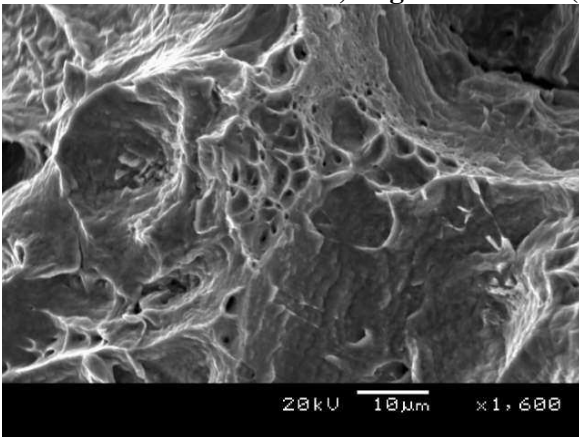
Fracture surface, laboratory induced overload fracture (x1600, SEM)
